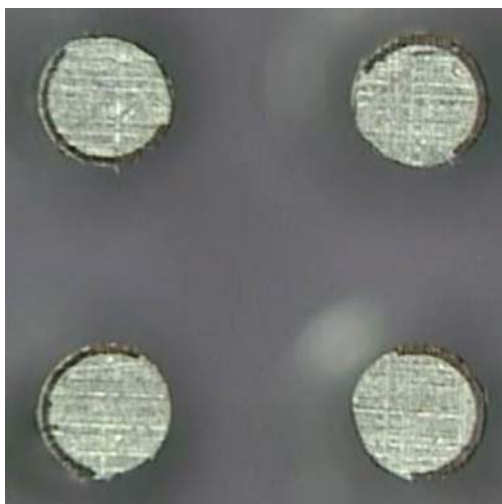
Top view of solder columns after trimming, lapping and polishing.
